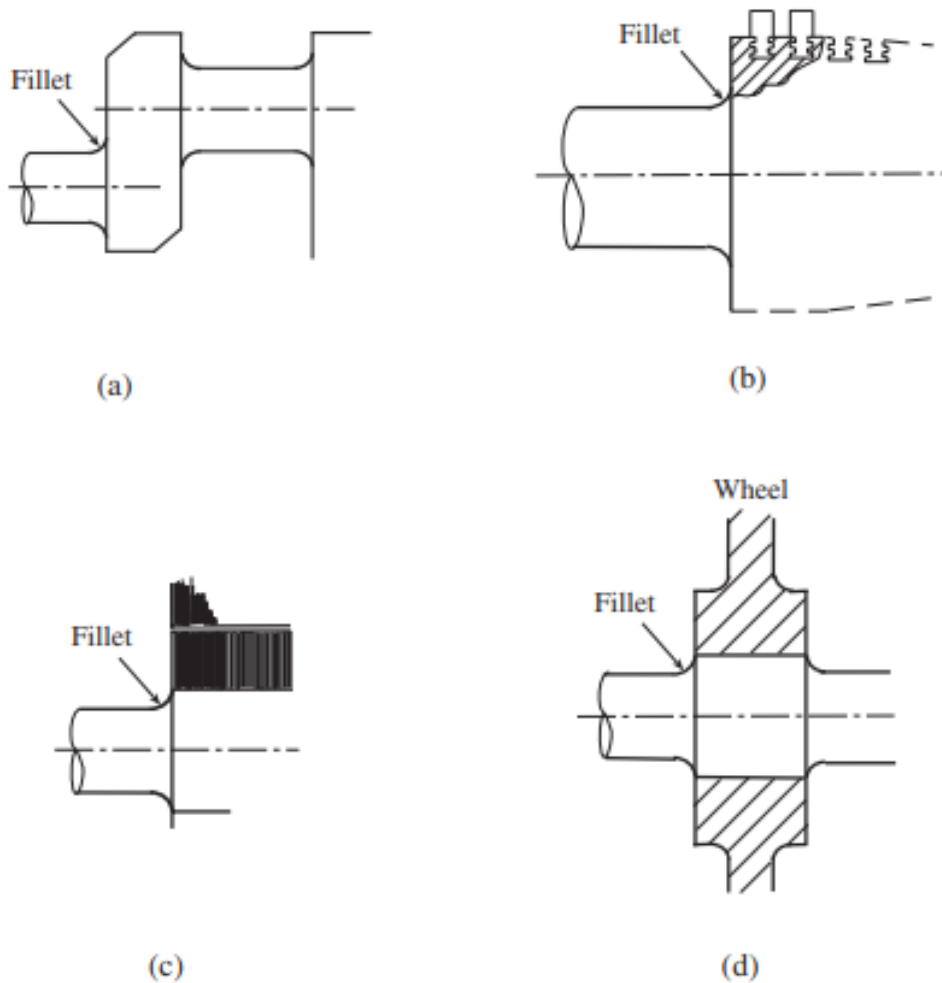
Examples of filleted members: (a) engine crankshaft, (b) turbine rotor, (c) motorshaft, (d) railway axle.[2]
